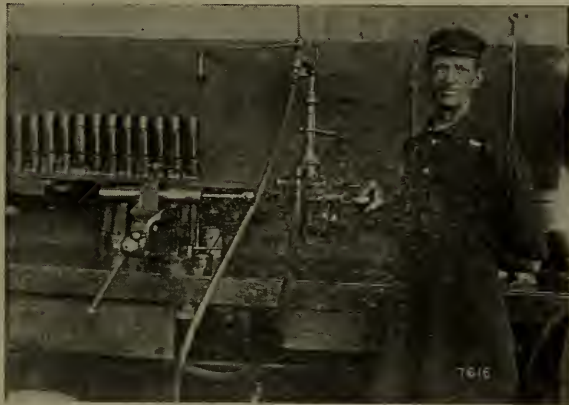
A pneumatic drill rigged in a swing for lapping cylinders.
